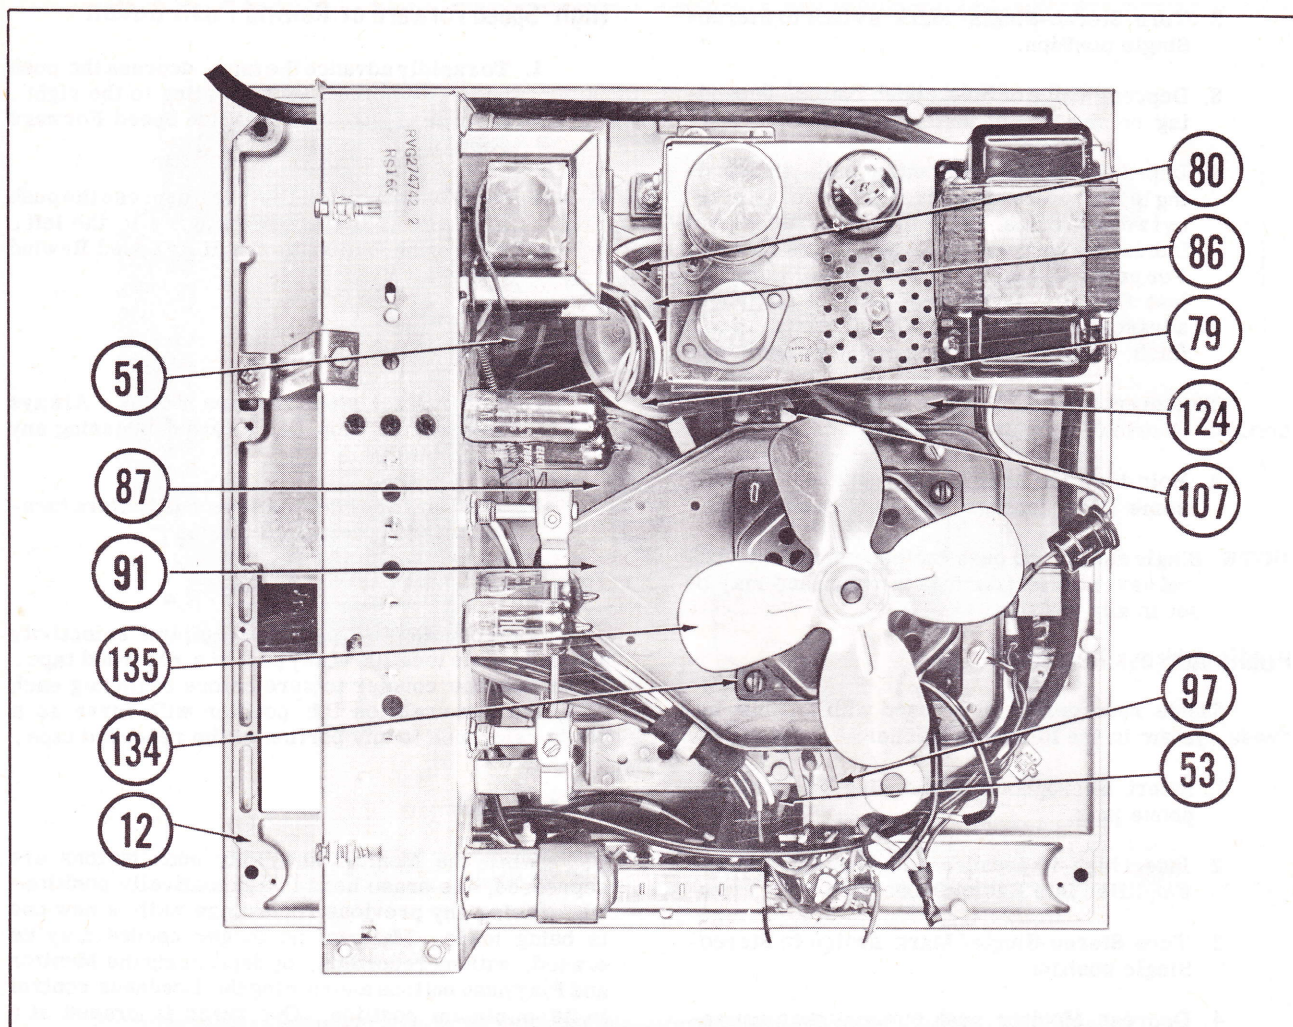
BOTTOM VIEW OF TRANSPORT MECHANISM
